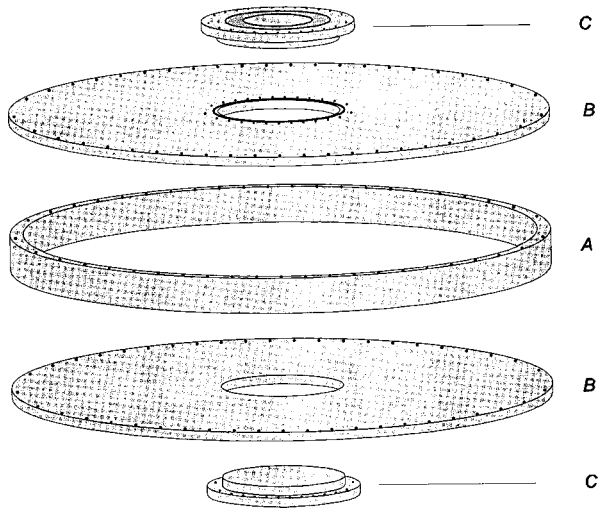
Unassembled view of the resonator used for the large radial wave thermoacoustic prime mover. Pieces C are stainless steel caps which allow access to the inner thermoacoustic elements. Pieces A and B are plain carbon steel.
